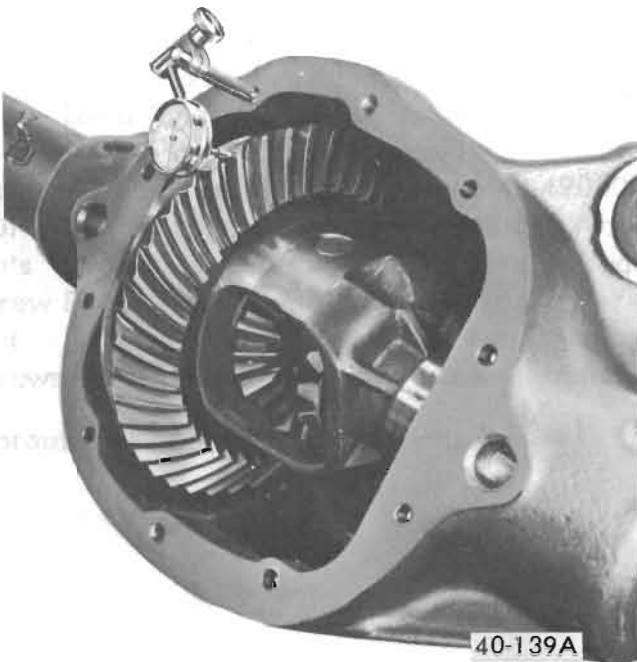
Checking Ring Gear to Pinion Backlash
